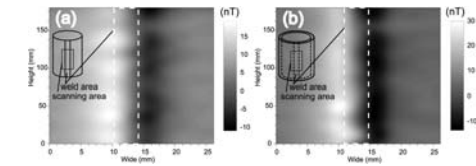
Contour plots of the normal magnetic field strength of the stainless steel welding sample (a) the welding part is on the surface (single layer), and (b) the welding part is inside the stainless-steel tube (double layer). The frequency of the applied magnetic field is 20Hz.
